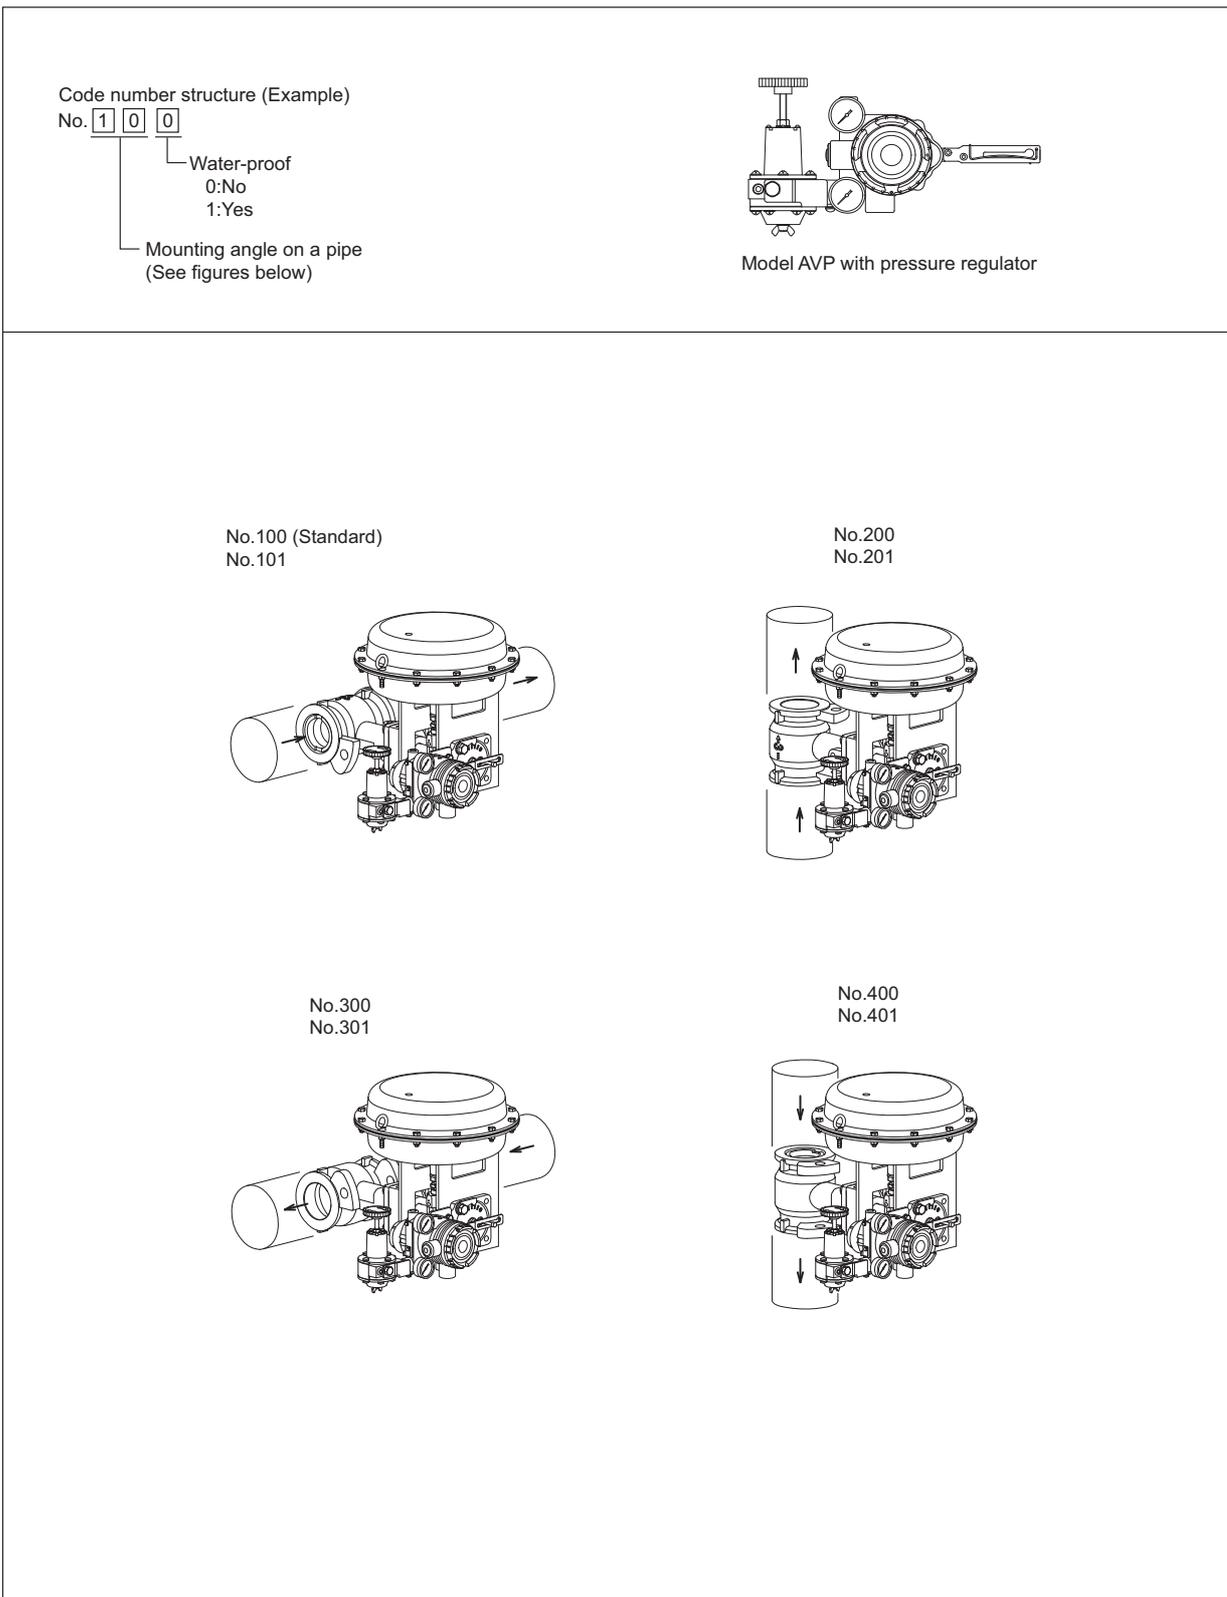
Mounting position of valve on process pipes (Applicable to model AVP positioner with pressure regulator)
